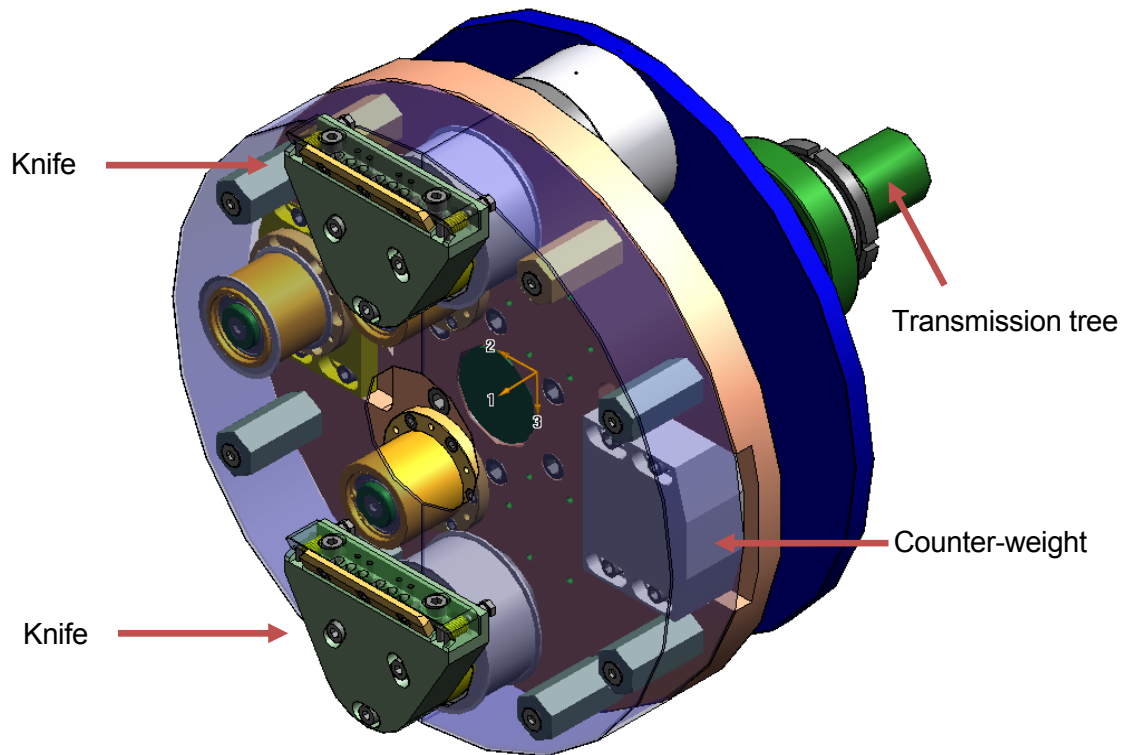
Solid Edge image (3D CAD) of the cutting zone of the unit
